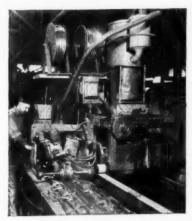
Dual welding unit mounted on traveling carriage for automatically welding both sides of heat dissipating structure at one time.
